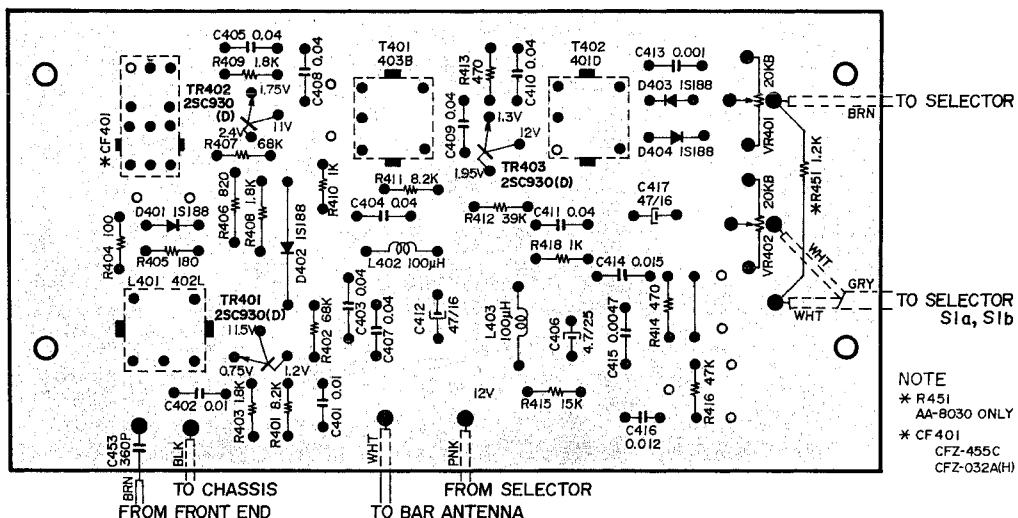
AM IF AMP. P.C. BOARD 4009 (Reverse Side)
